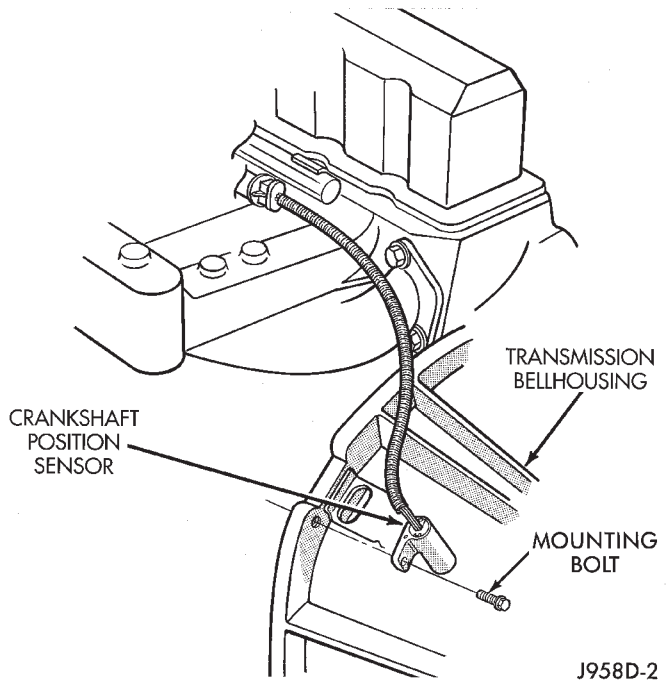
Crankshaft Position Sensor—4.0L Engine
